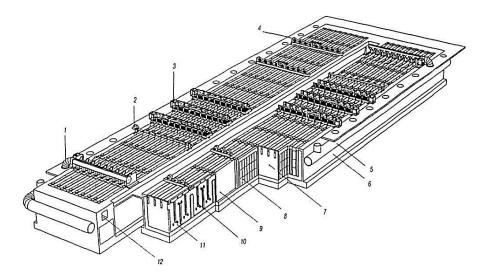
Open anode furnace: 1 – exhauster, 2 – rarefaction control ramp, 3 – fuel bridge, 4 – air cooler, 5 – central smoke bore, 6 – concrete frame, 7 – dividing wall, 8 – anodes, 9 – cassette, 10 – partitions, 11 – heating wall, 12 – flip channel.
